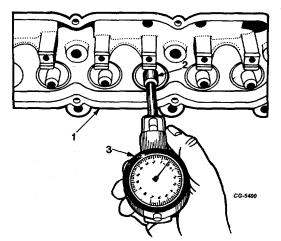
Checking Guide Bore Using Gauge SE-2506
